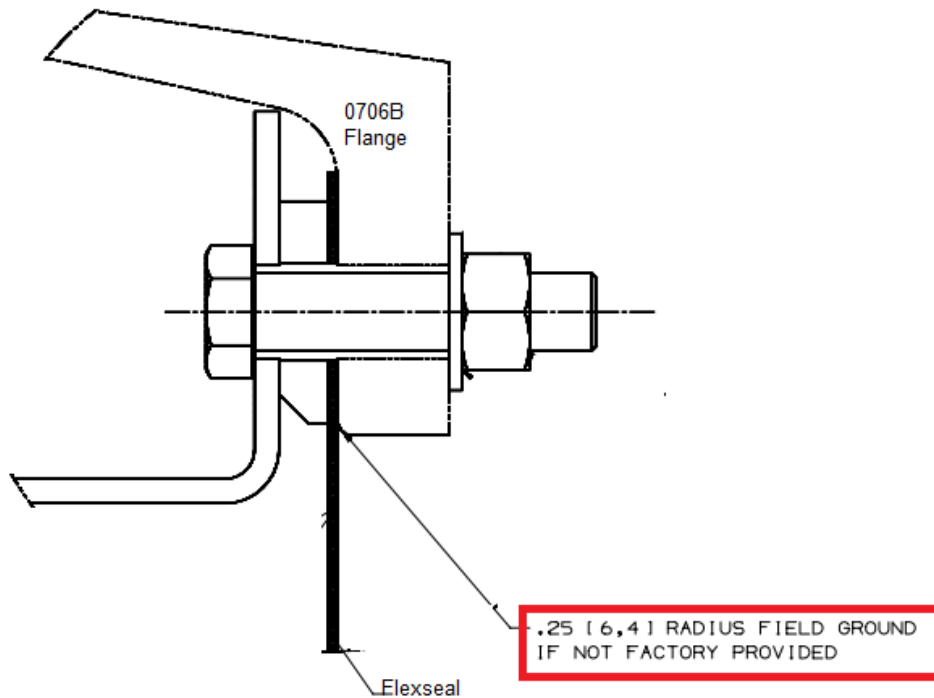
Tadpole clamp plates and 1st and 3rd layer clamps edges
